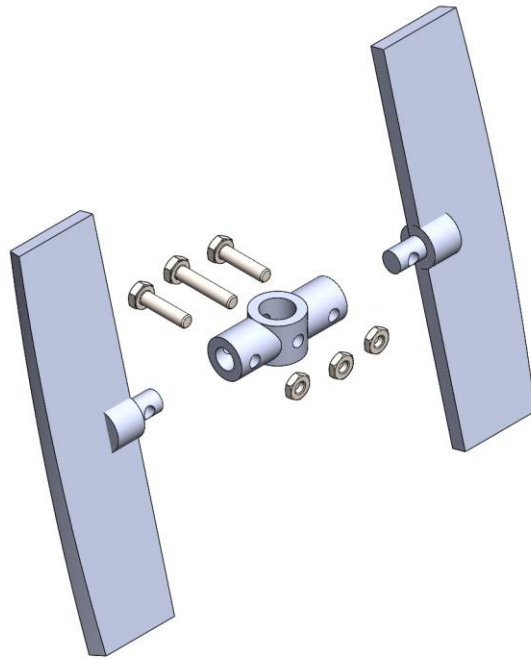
How the paddles will be inserted into the paddle attachment. Lining up the holes will ensure the correct angle. Bolts through the holes will fasten the parts to each other.
